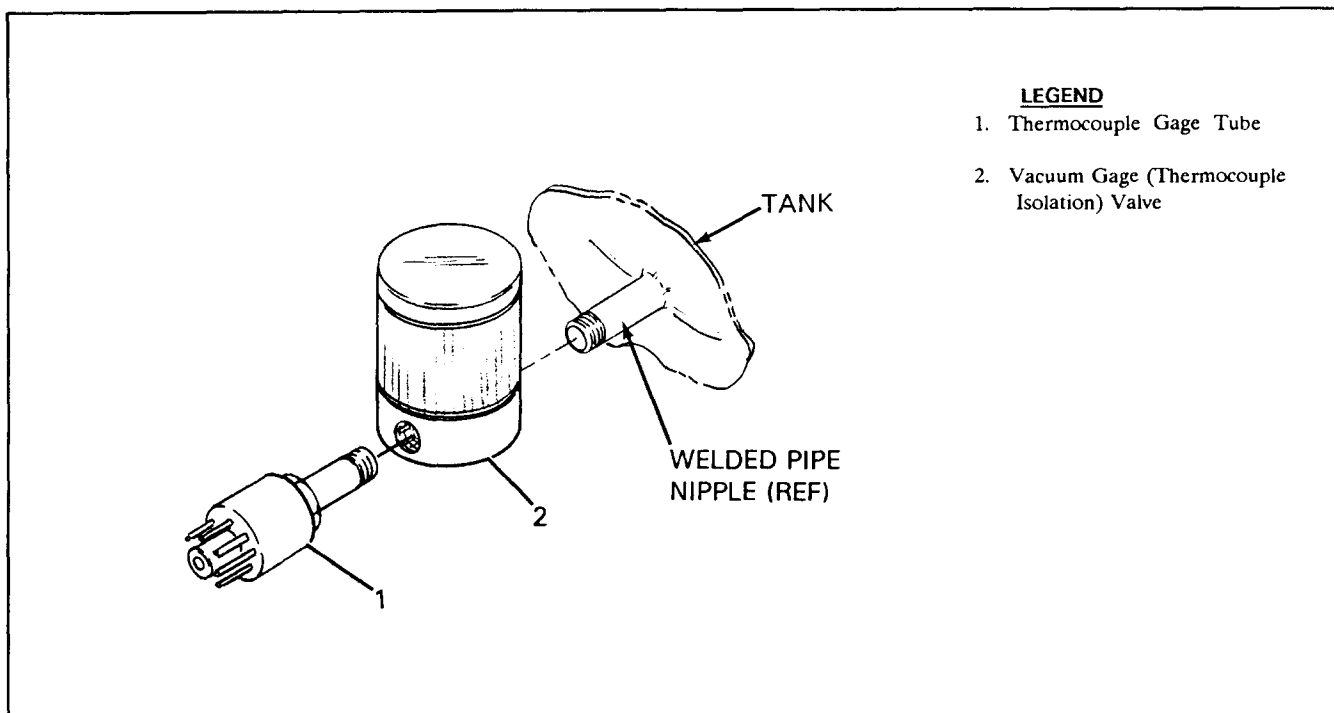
Thermocouple and Vacuum Gage Valve Assembly
